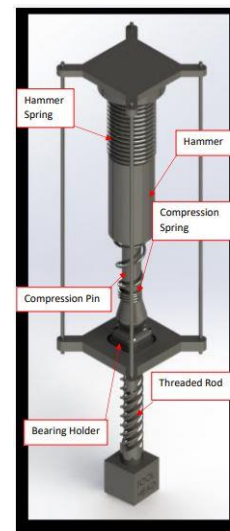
Yankee Screw Punch with casing removed. All internal parts are shown and annotated. Rendered in SOLIDWORKS 2020.
